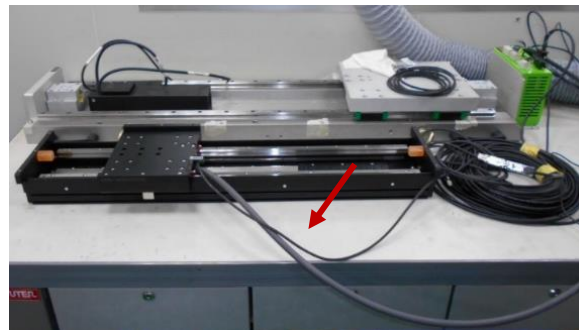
Extension cable is not put into the cable chain
